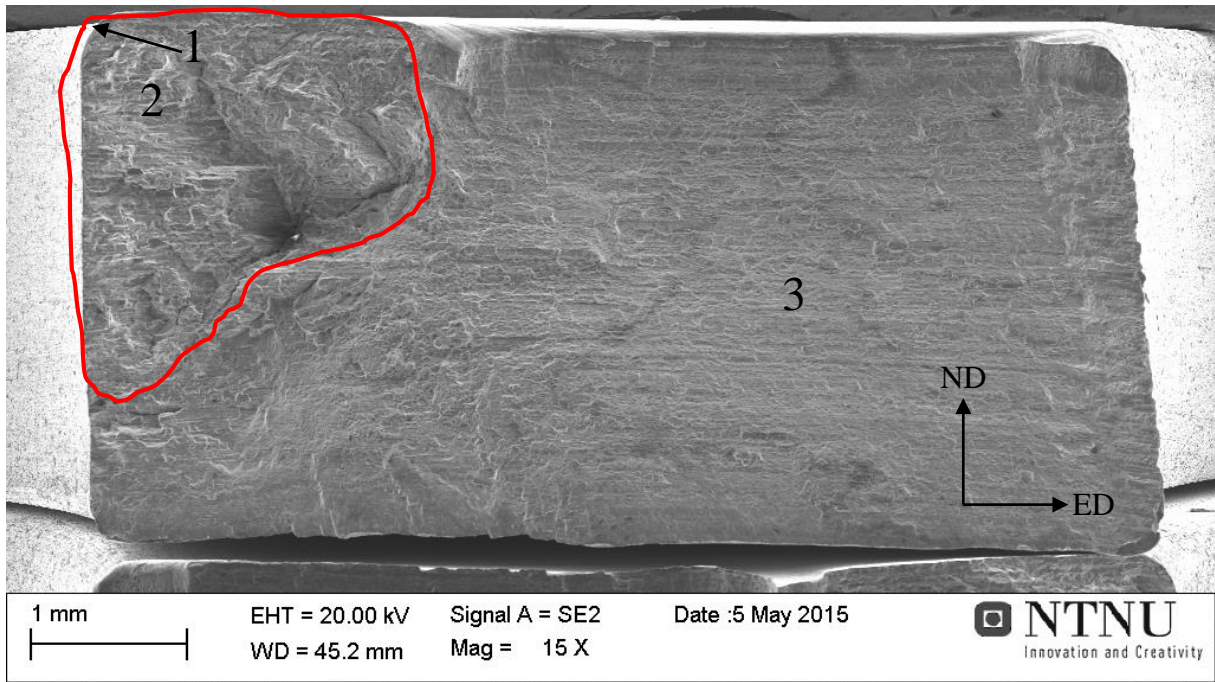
An overview of the fractured surface of AA7108 T4 with the shortest fatigue life, 15X magnification. The fatigue fractured area is enclosed by the red line.
